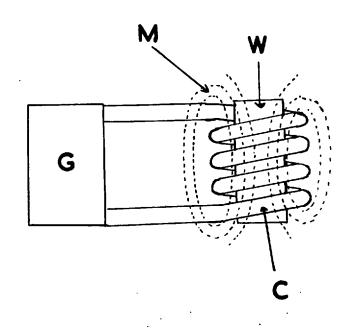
Drawing of a hollow copper coil C surrounding a work piece W - an external coil.
